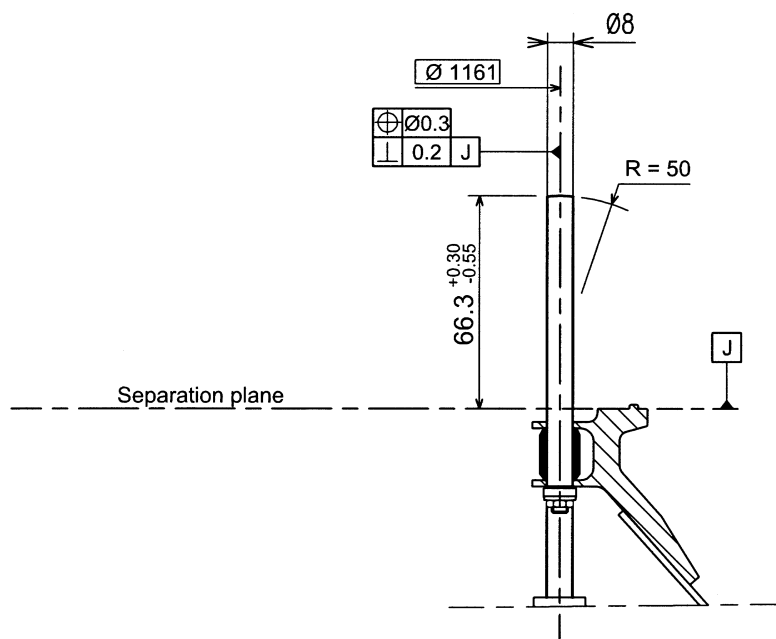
Adaptor 1194B mechanical interfaces (details)
